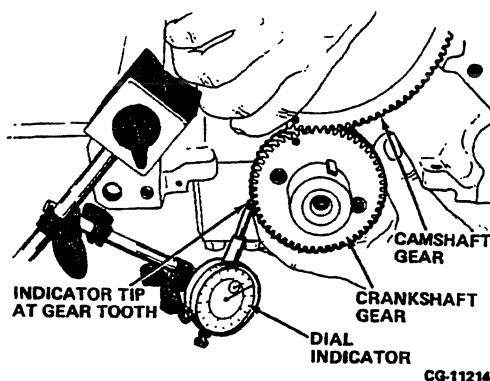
Checking Camshaft and Crankshaft Gear Backlash
